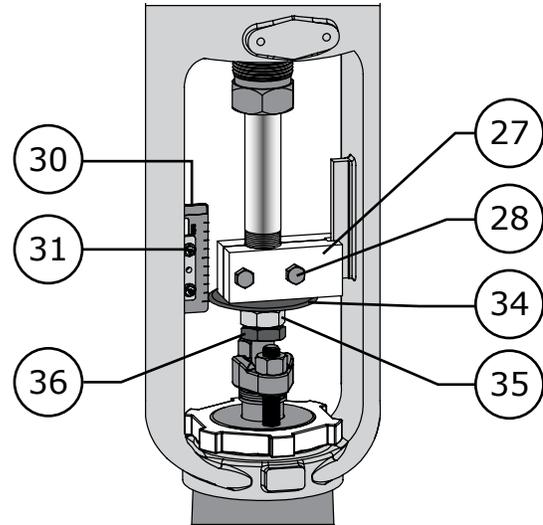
Size 3220 & 3220-4 DFC Connecting Block Detail
